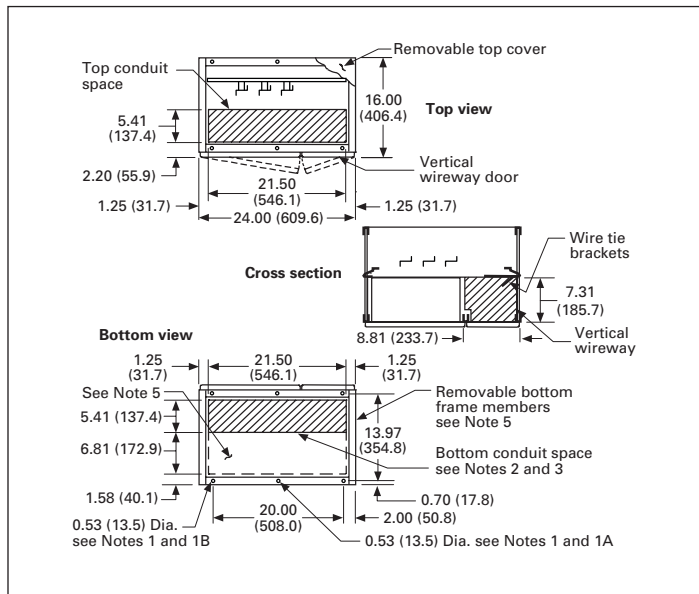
24 inches wide, 16 inches deep, front mounted only (4710A33)
